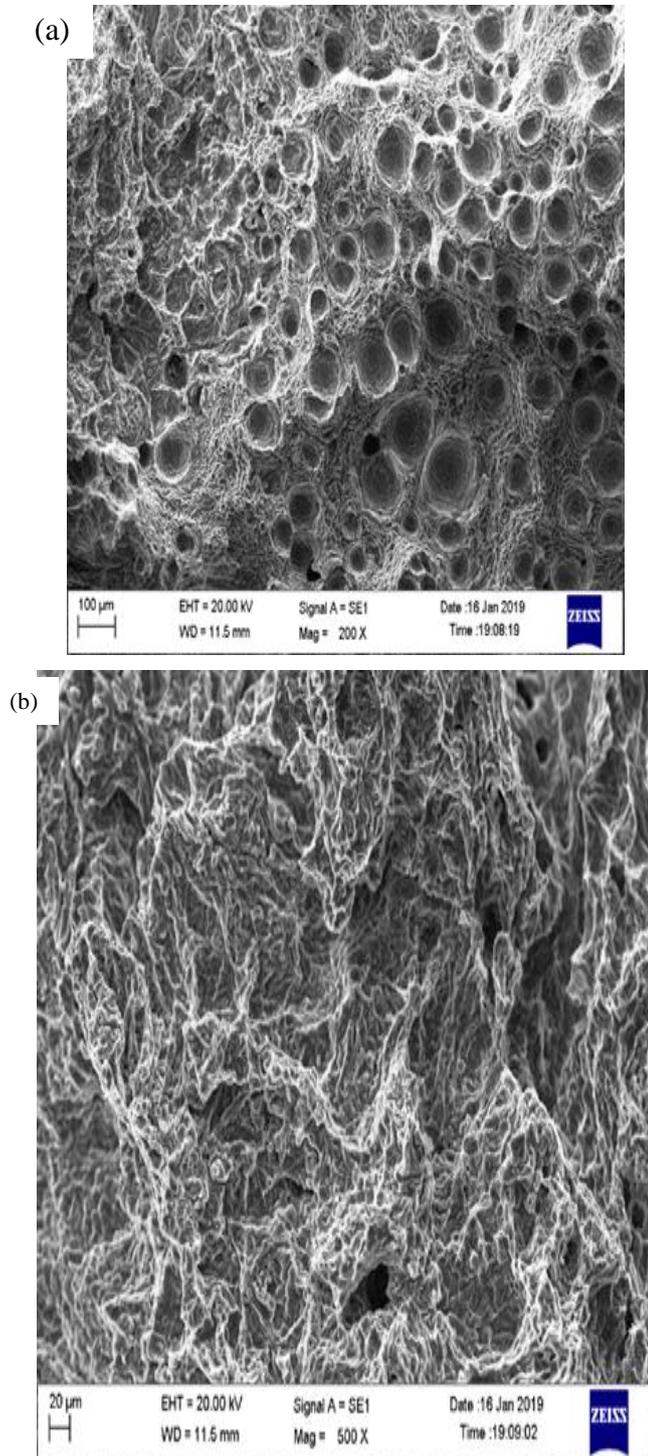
Fracture surface of the (a) AA6061 alloy (b) MIG welded AA6061 alloy
